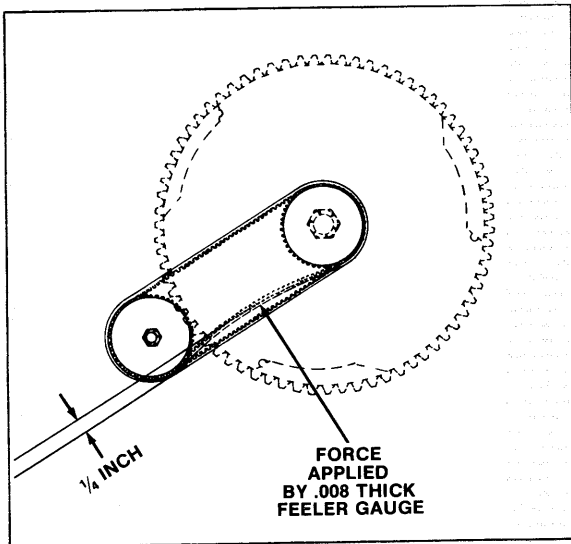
Measuring Belt Deflection Using .008" Thick Feeler Gauge
